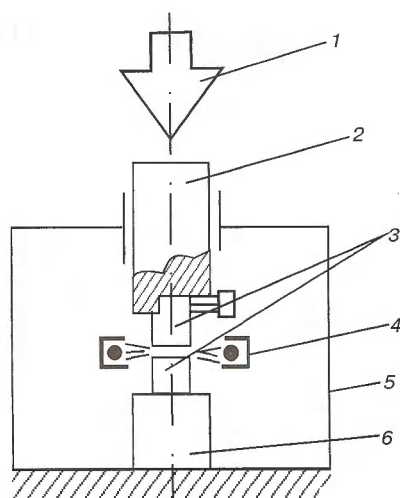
Schematic of vacuum percussion welding: 1 — striking pin; 2 — rod; 3 — samples joined; 4 — annular electron beam heater; 5 — vacuum chamber; 6 — anvil block
